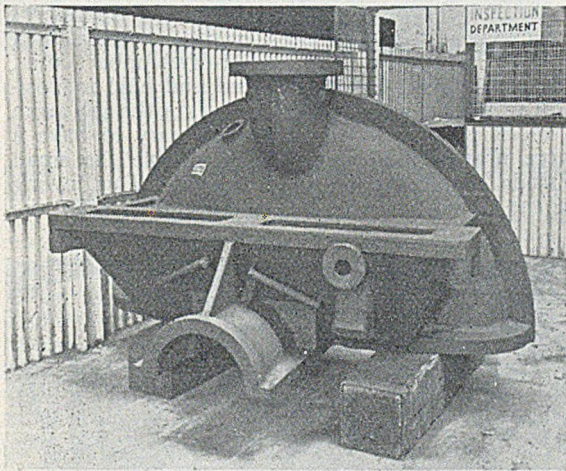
Exhaust-casing Casting representing an Intricate Job if made from a Block Pattern.
